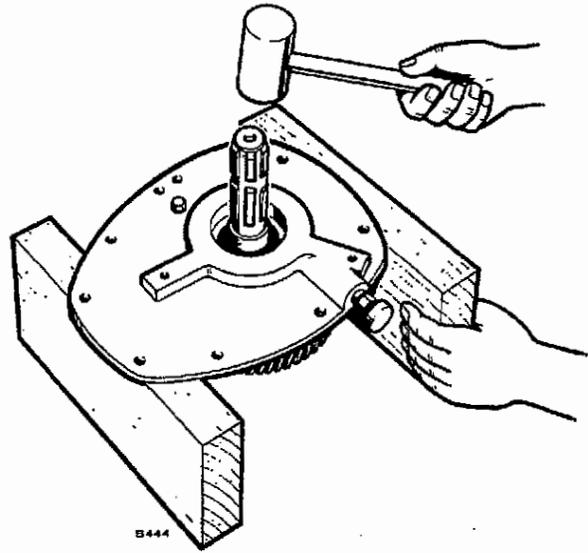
REMOVAL OF PTO SHAFT FROM GEAR CASE PLATE
